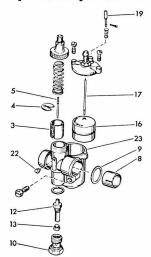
Exploded view of carburetor typical of type used on DI model.
